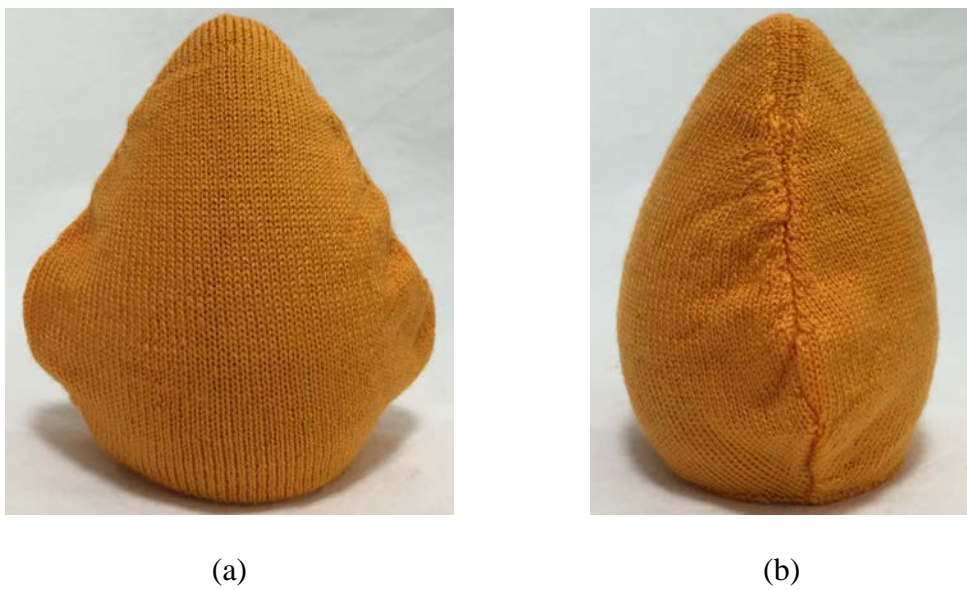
(a) The front view and (b) the side view of the 3D knitted shape by method 3DSL-2
